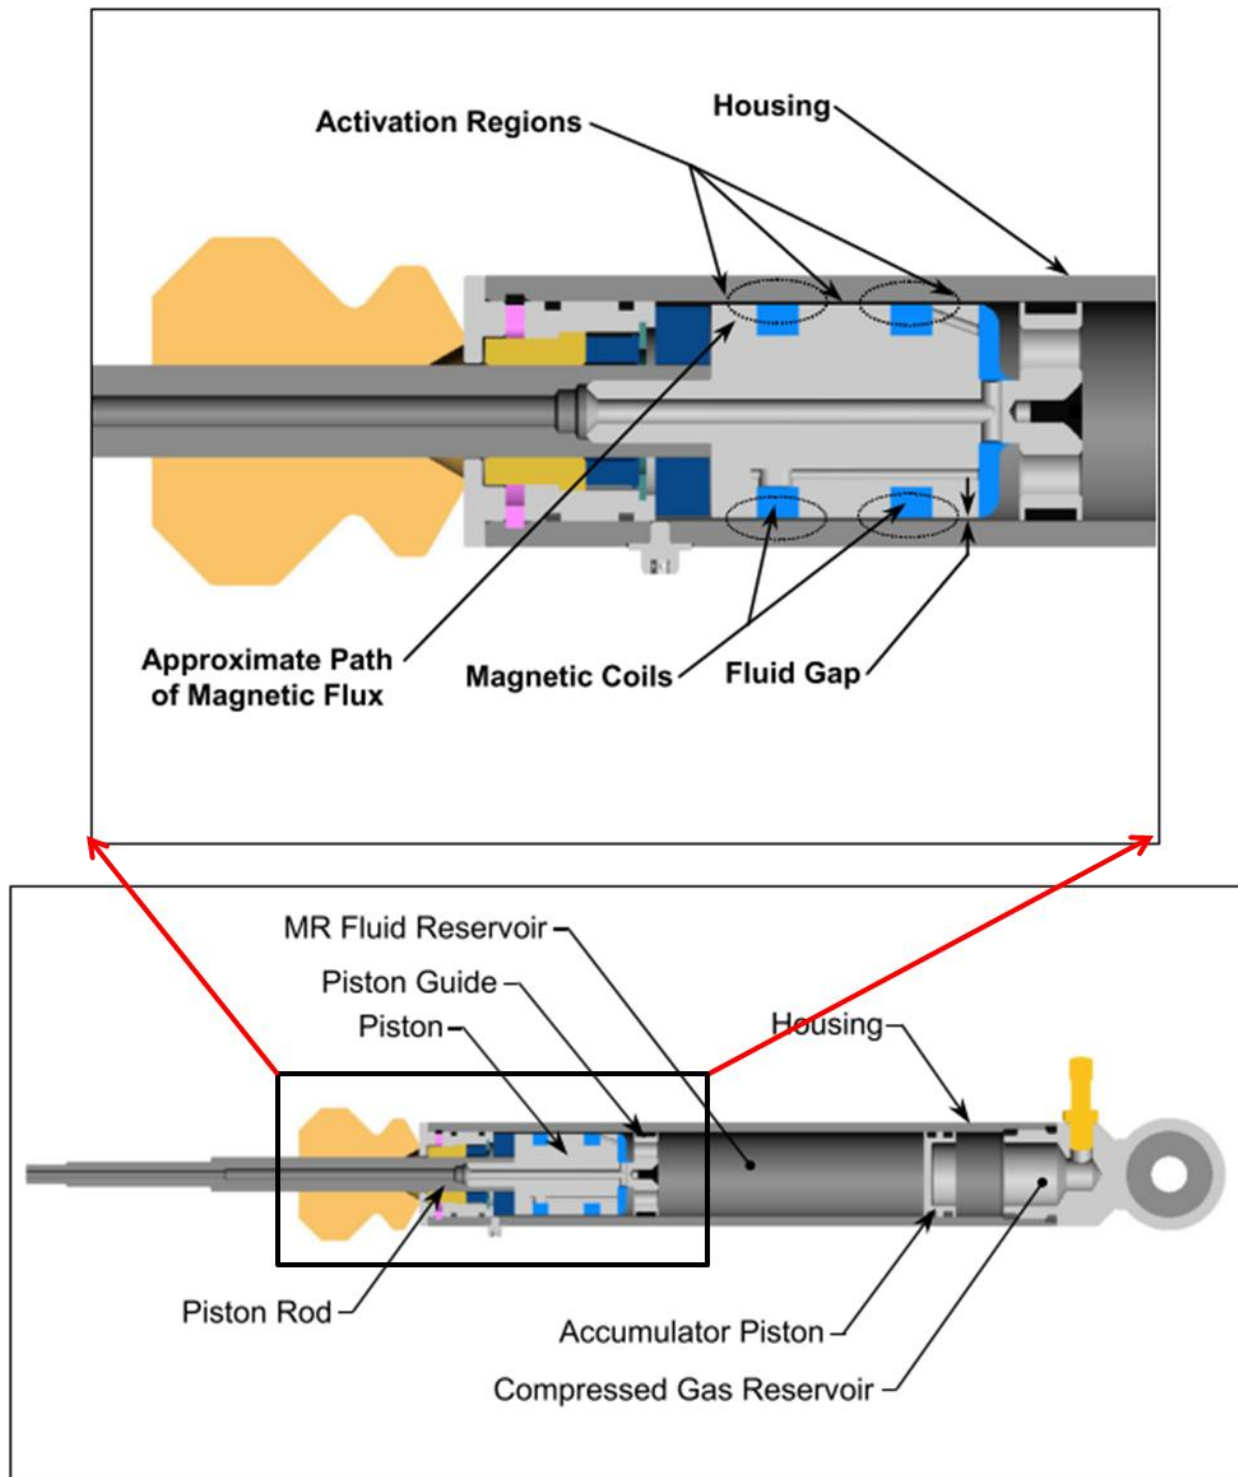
Section View: Typical mono tube MR damper [adapted from 5]
